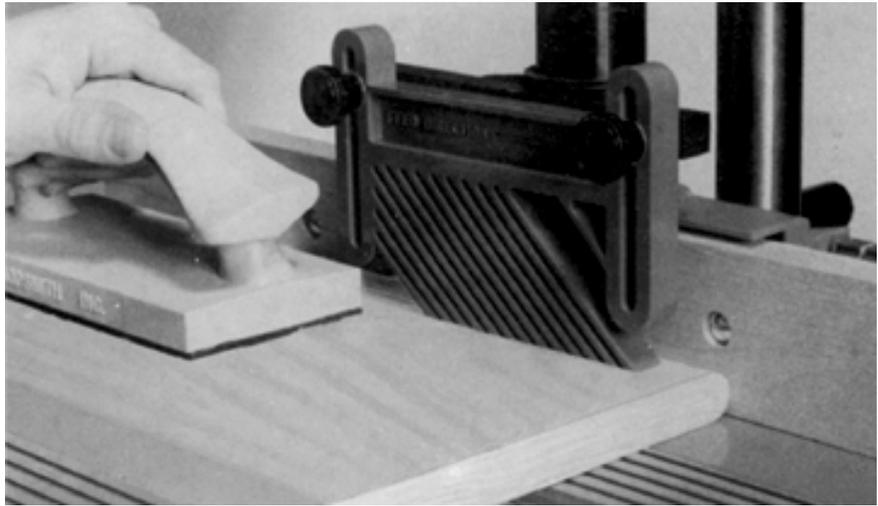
The nosing cutter of a flute and nosing set of cutters is used here to round off the edge of a workpiece.
